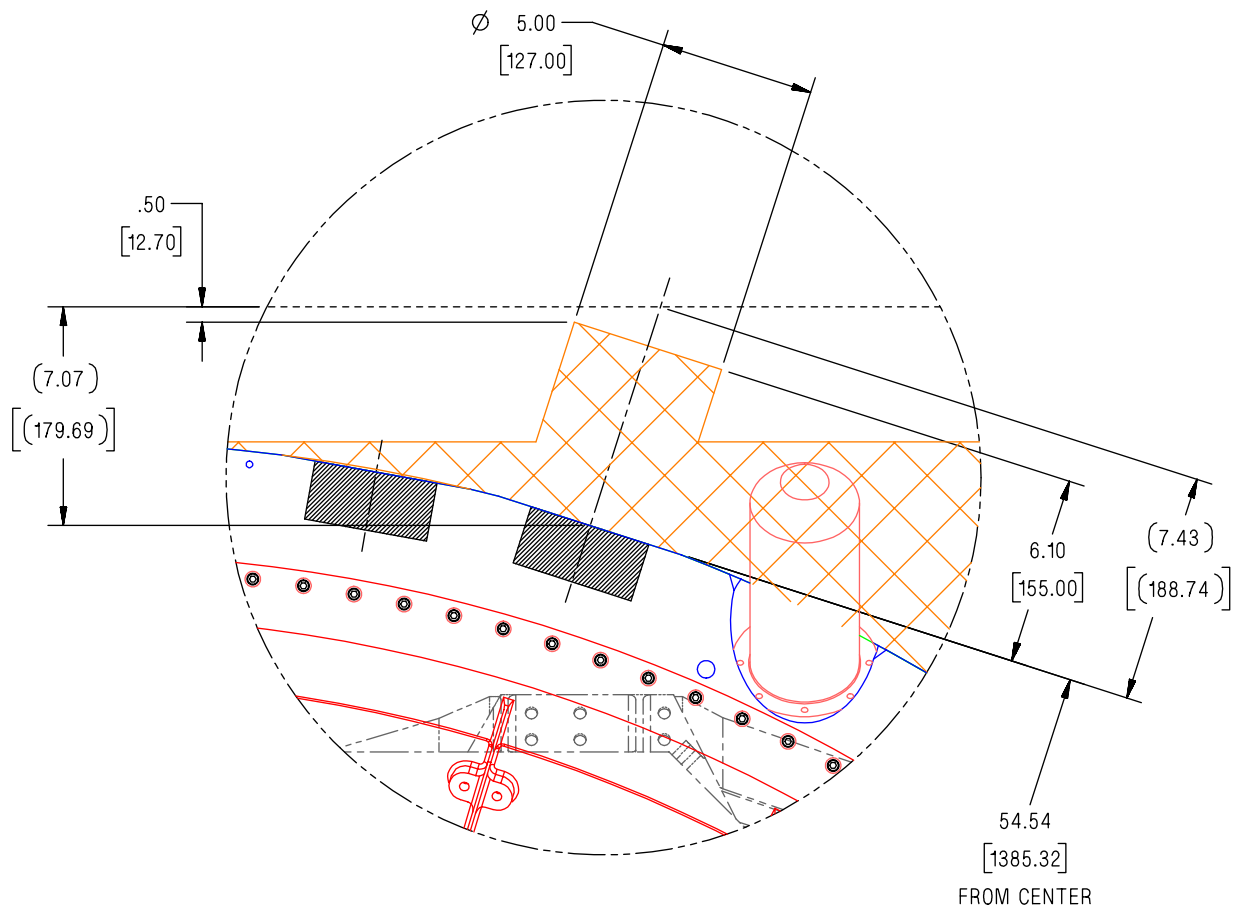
Detail View of the Keep Out Zone for the VC/USS-02 Assembly
